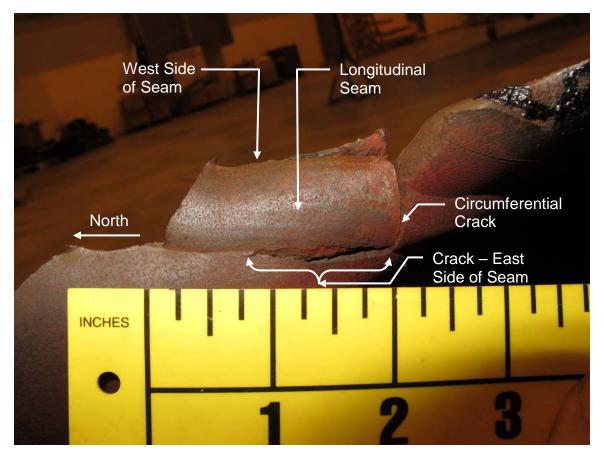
Fracture, a crack, and out of plane bending at a longitudinal seam on the southern section.
